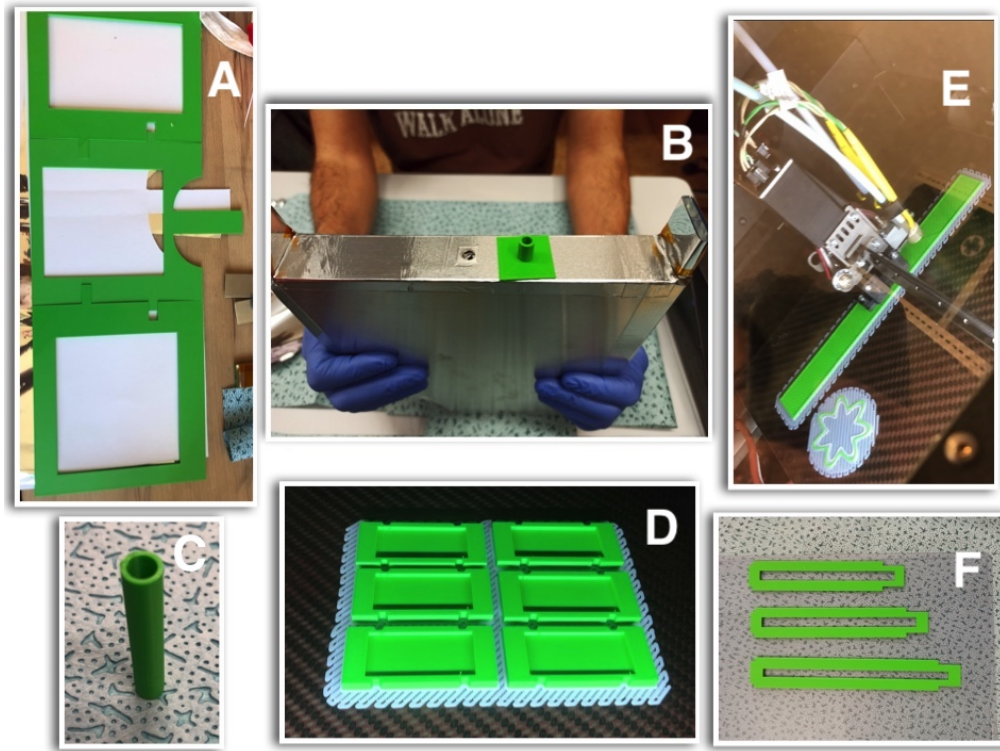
Pictures of 3D-printed ABS parts: template for aluminium foil (A), laser connector for the scintillator (B), laser connector for the PMT (C), base used for gluing of the fibre connectors (D), the 3-D printer in action (E), template for Mylar foil (F).
